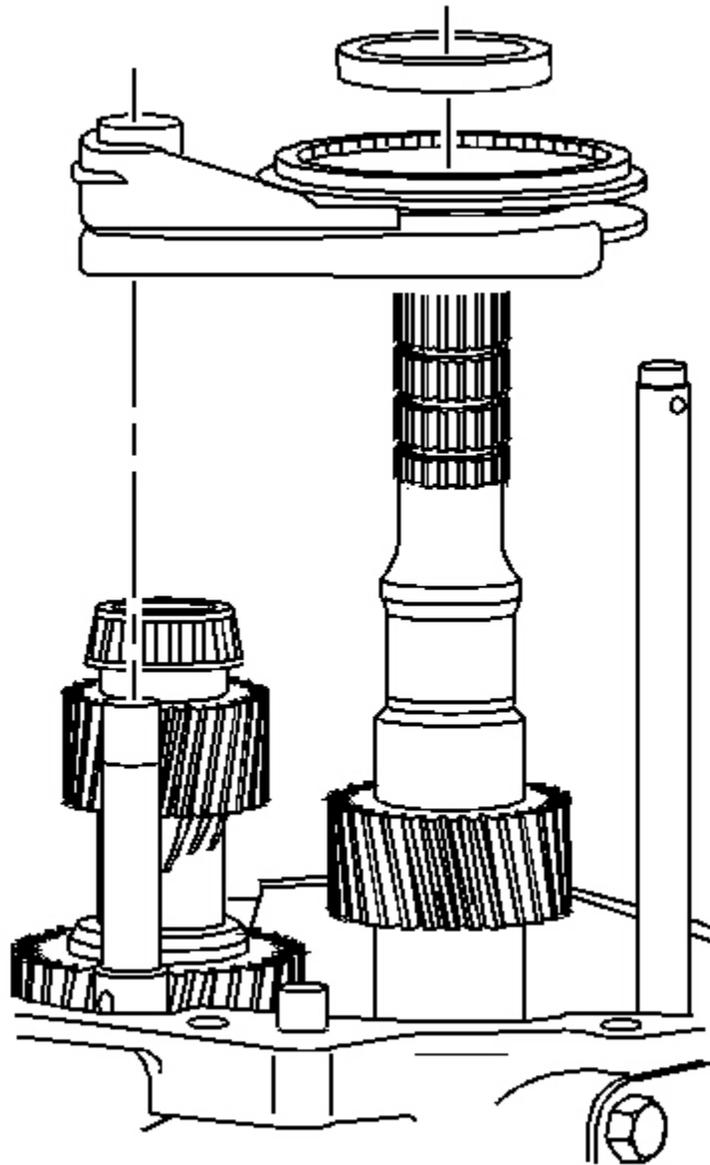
Installing/Removing Reverse Shift Fork, Synchronizer & Thrust Washer
